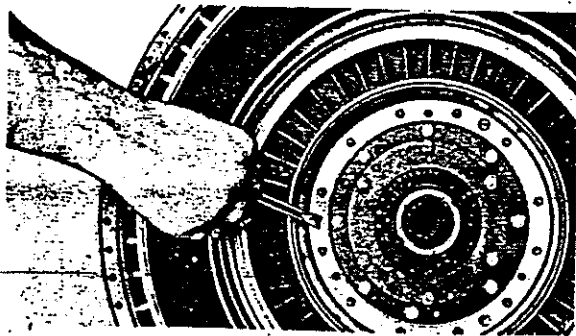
Removing First Stage Turbine Nozzle Assembly Screws
